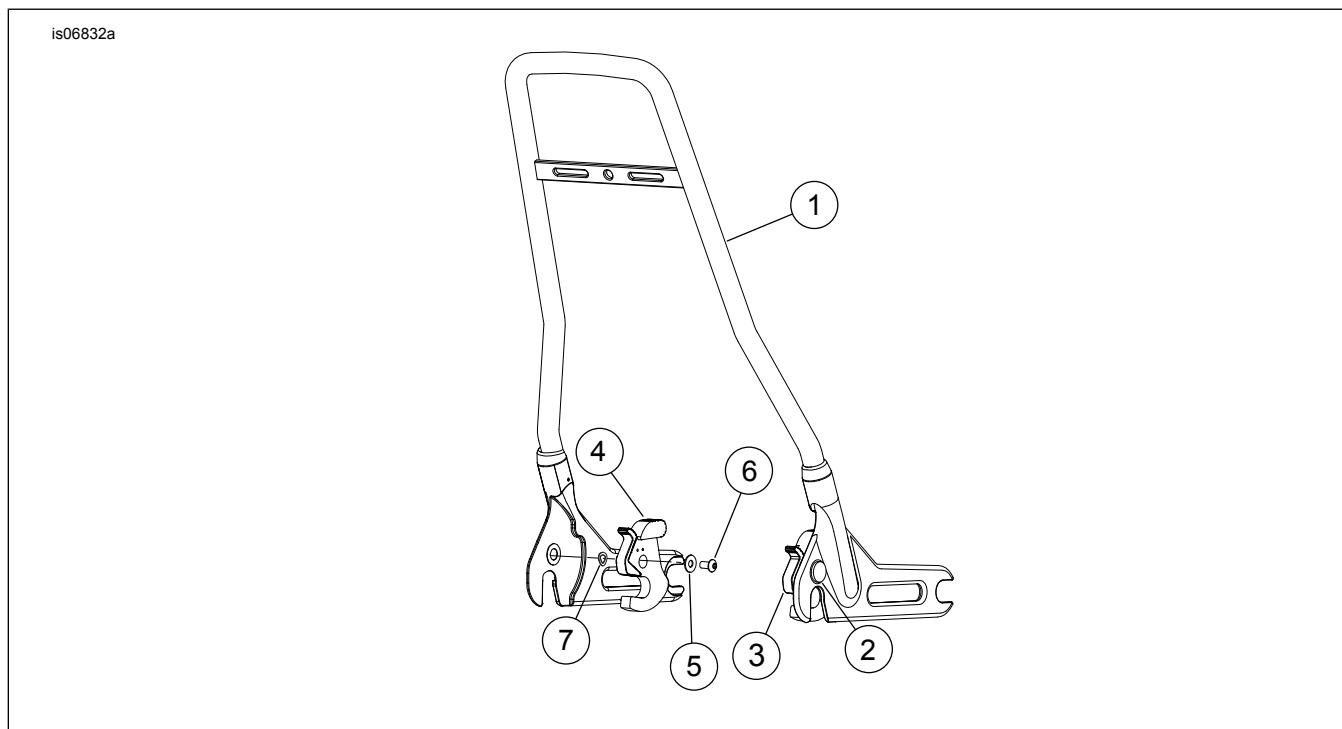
Service Parts: Detachable Sissy Bar and Rear Bracket License Plate Assembly
